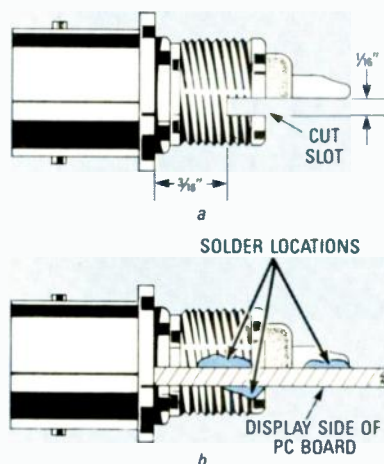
A BNC CONNECTOR must be modified as shown in a so that it can be soldered to the PC board as shown in b.
